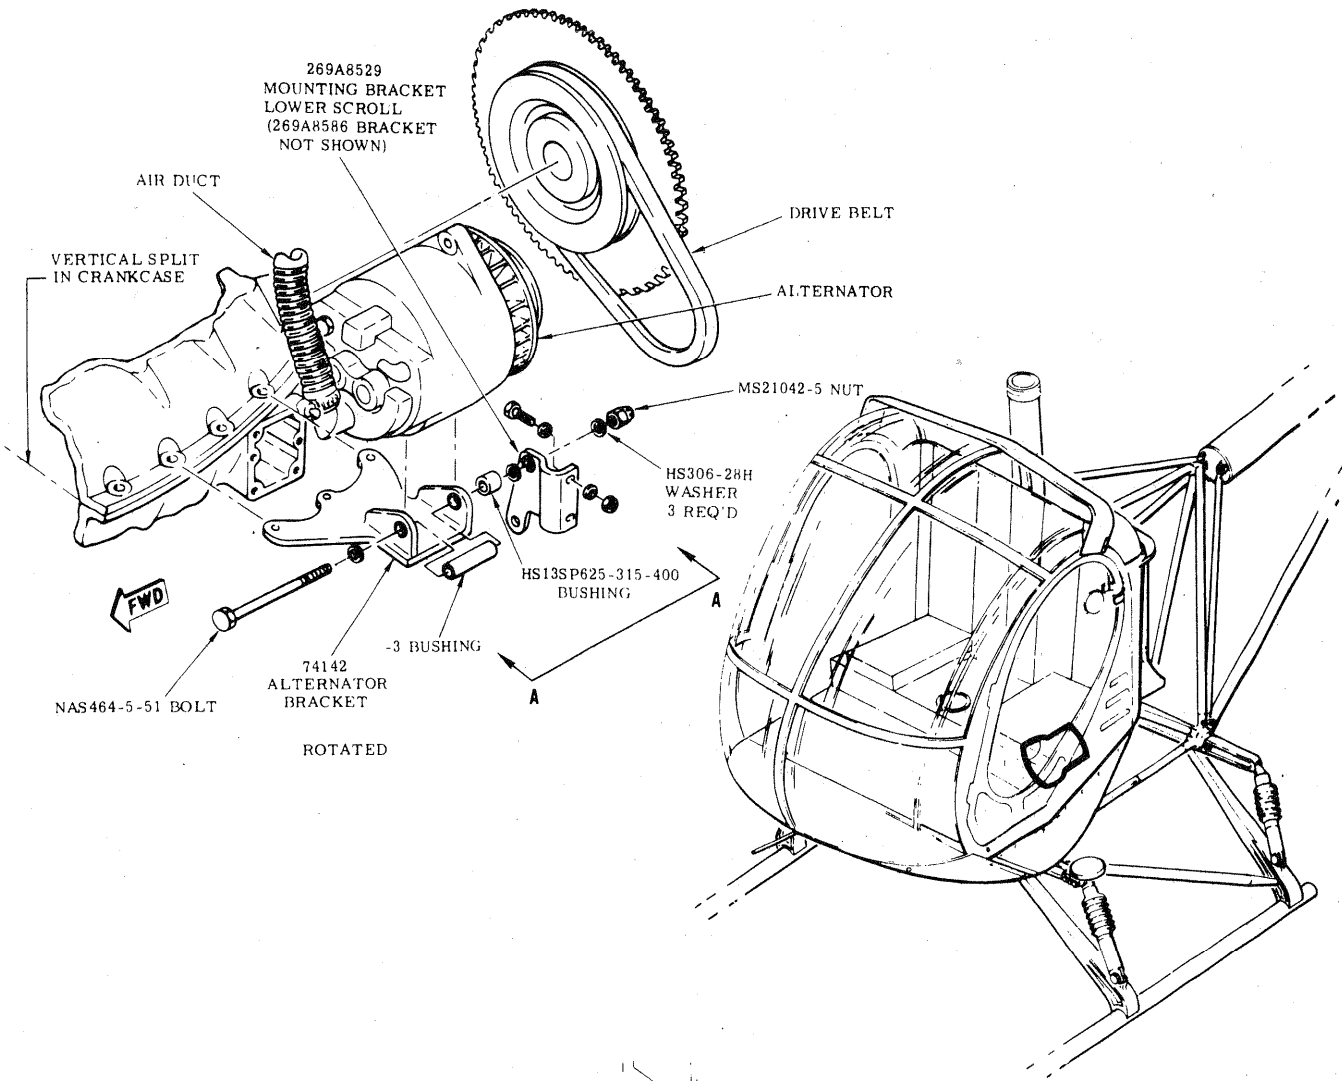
ALTERNATOR MOUNTING ASSEMBLY
